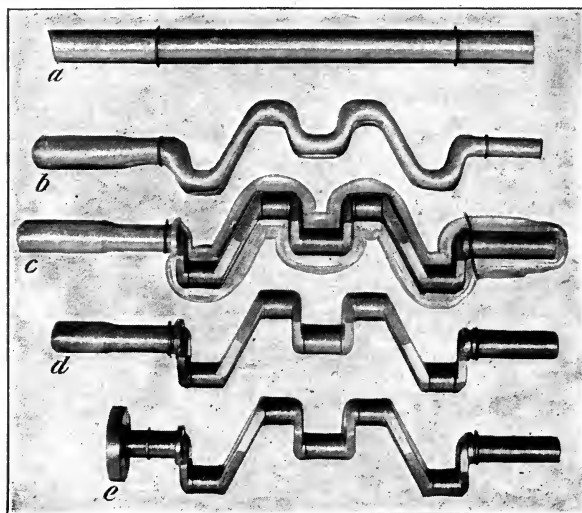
Steps in Forging an Automobile Crank Shaft.
